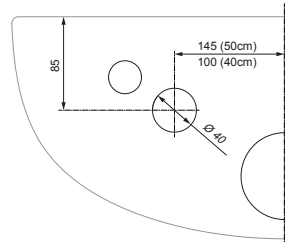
Front view of panel showing hole position at 145 for copper pipes, for 50cm wash basin with left hand tap hole. DRILL AT 100 CENTRES FOR 40CM WASH BASIN
